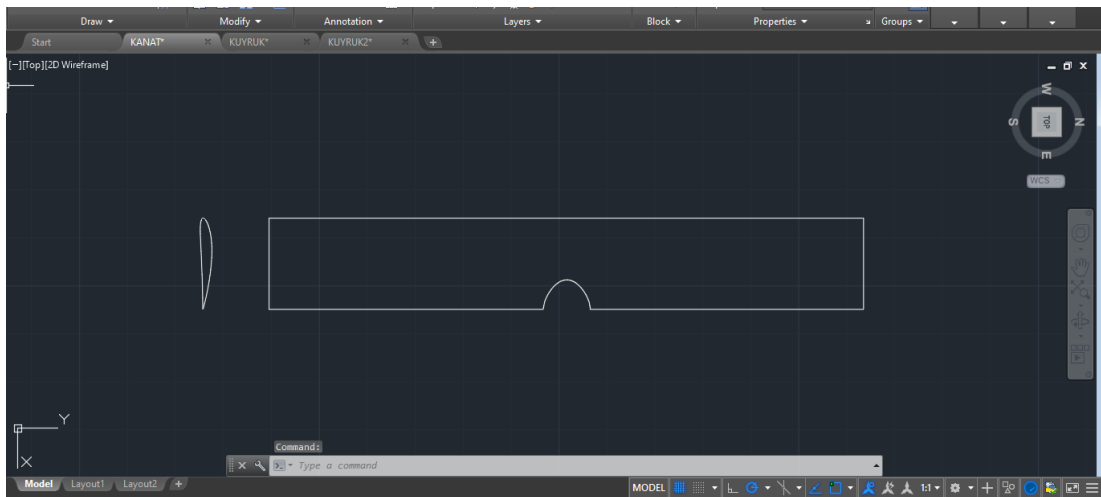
NACA 4412 Drawn on the AutoCad for CNC Foam Cutting Machine
